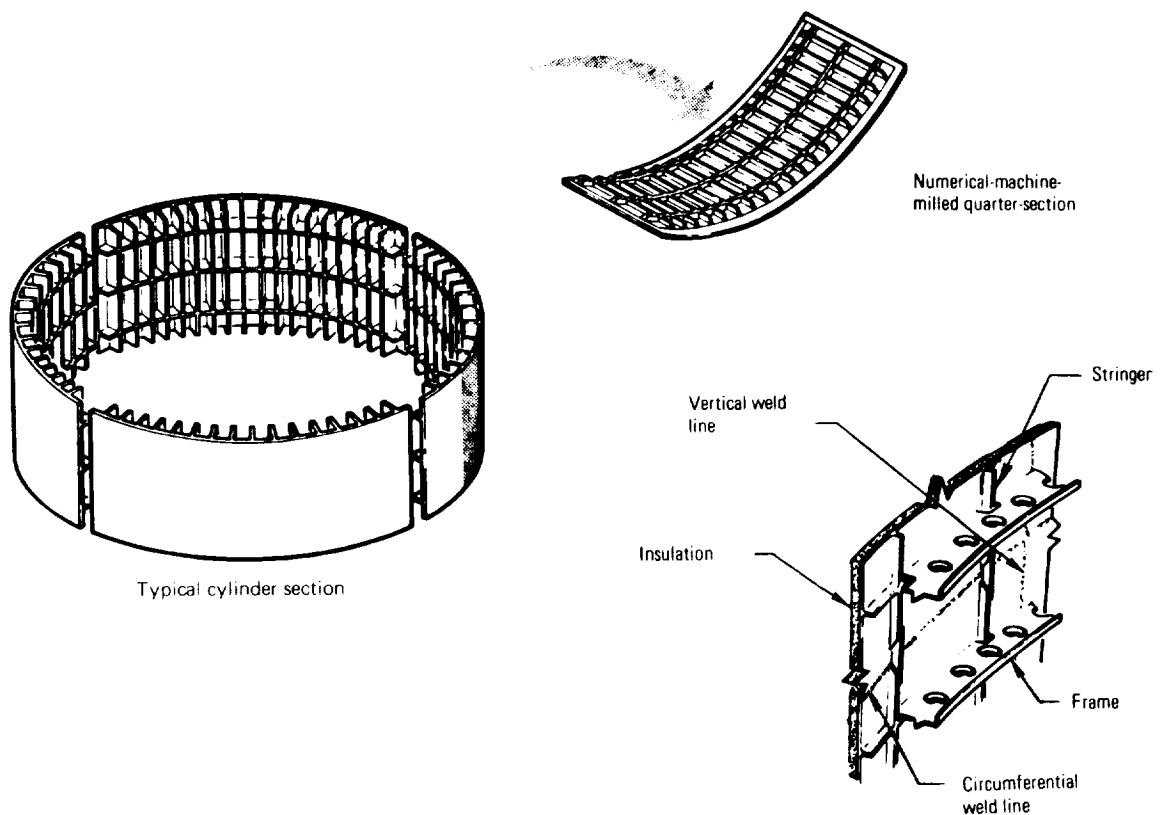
Sidewall construction on LH_2 tank for Saturn S-II stage.
